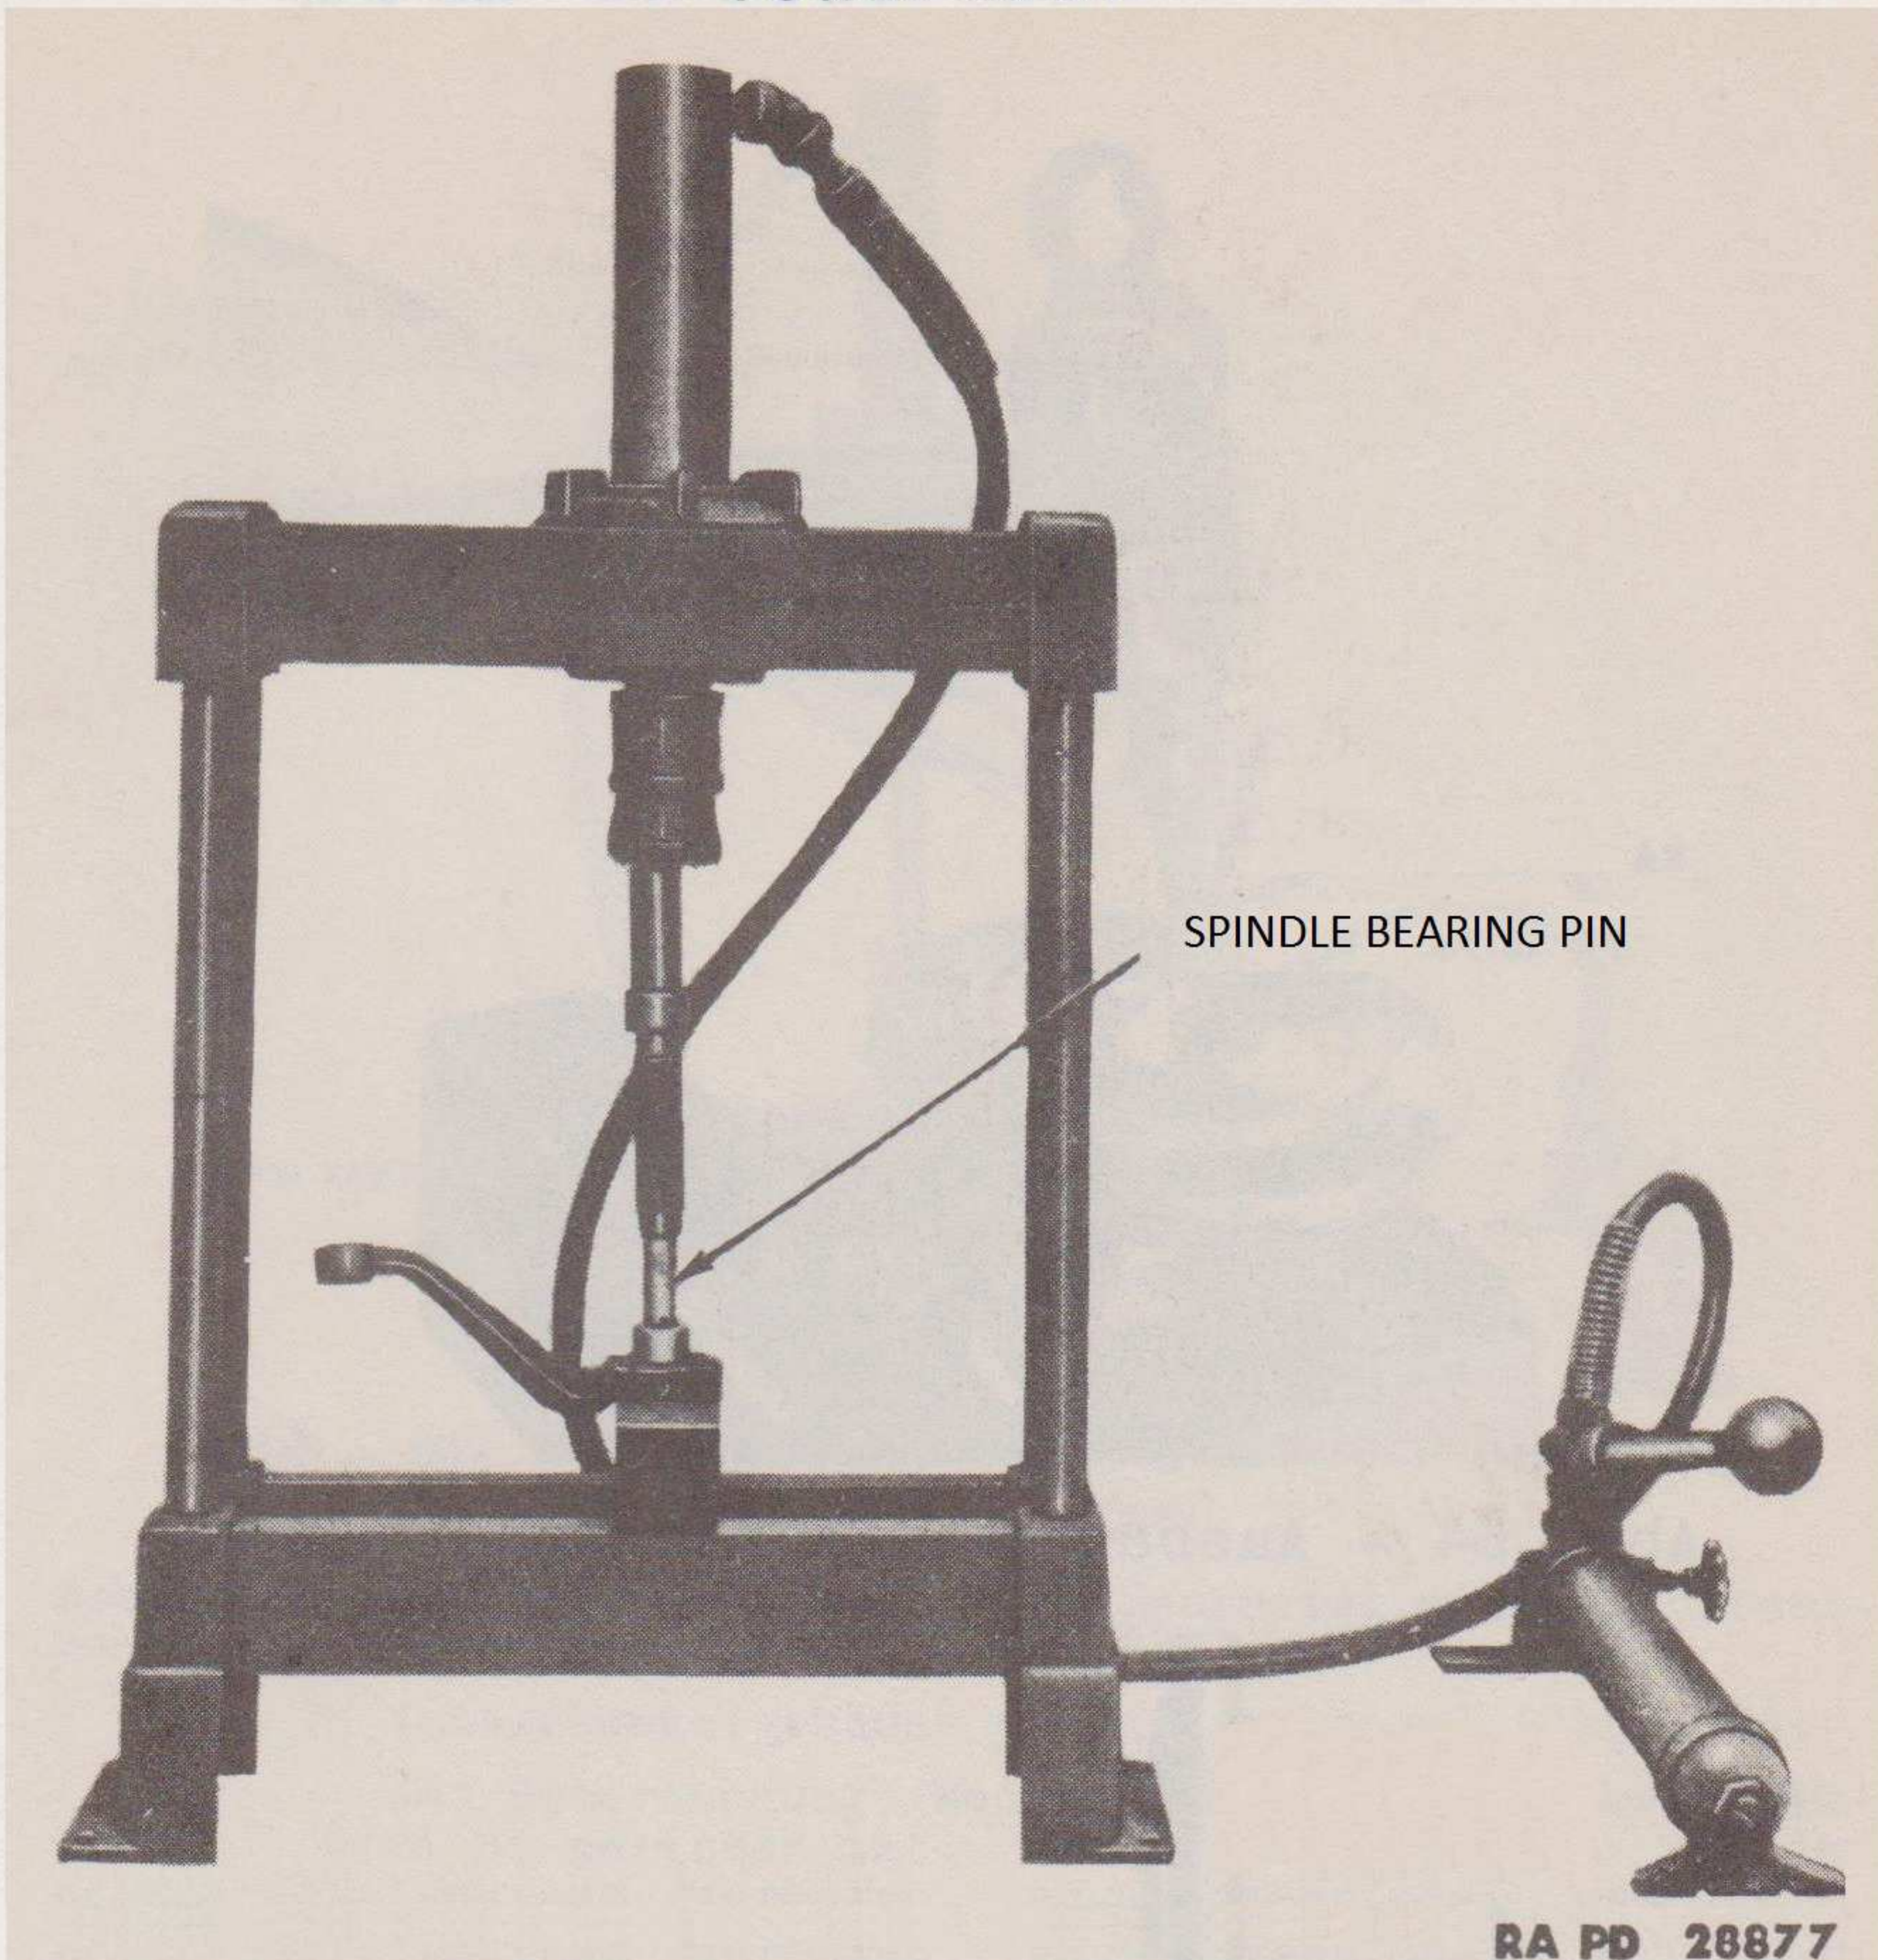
Replacing Spindle Bearing Pin in Spindle Arm
